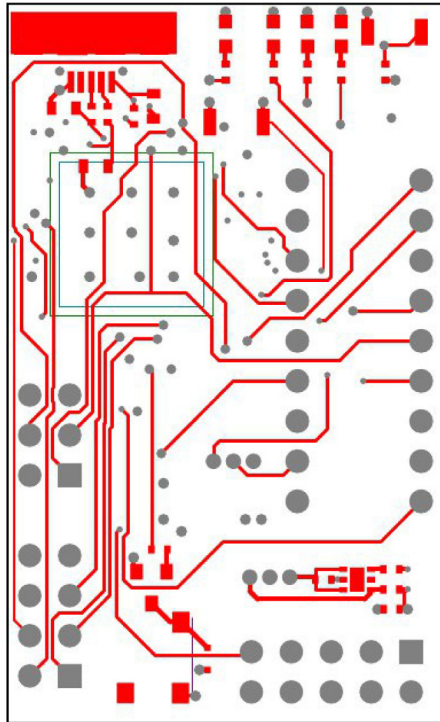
PC Interface Board; Middle Layer 1, Top View (as if PCB was Transparent)
